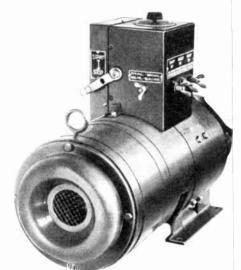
A 150-amp single-operator motor-generator set for light-gauge welding
